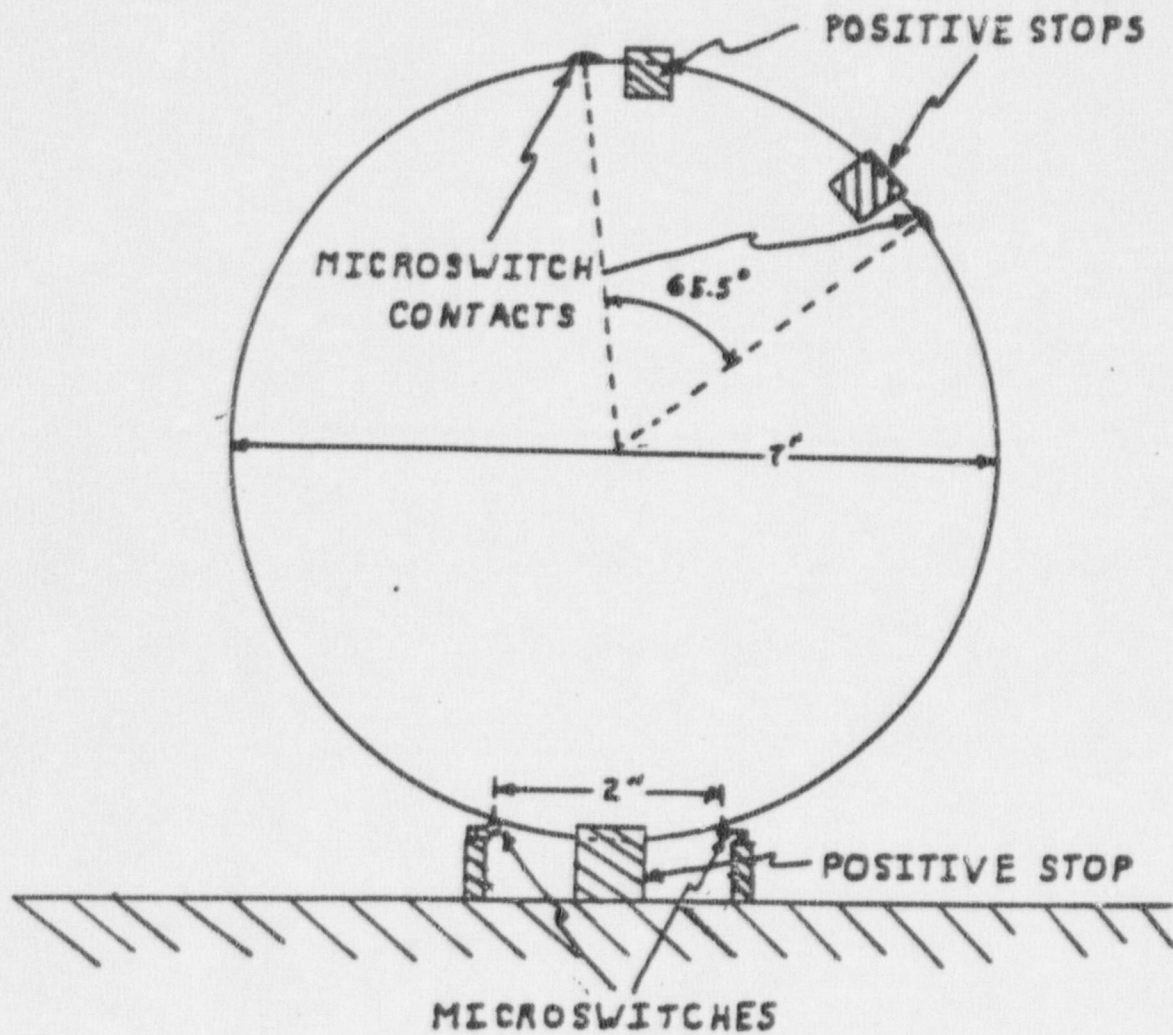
Sketch of Side View of the Poison Rod Pulley Showing Position of Microswitches and Positive Stops
